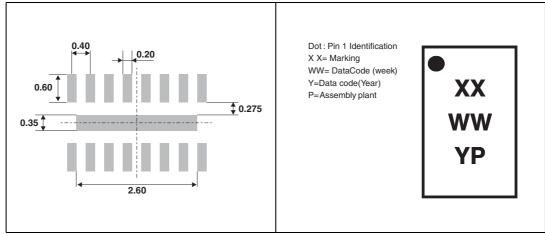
Micro QFN 3.3x1.5 16L footprint (dimensions in mm)
